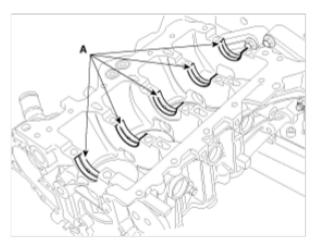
Identifying Upper Bearings Courtesy of HYUNDAI MOTOR AMERICA
